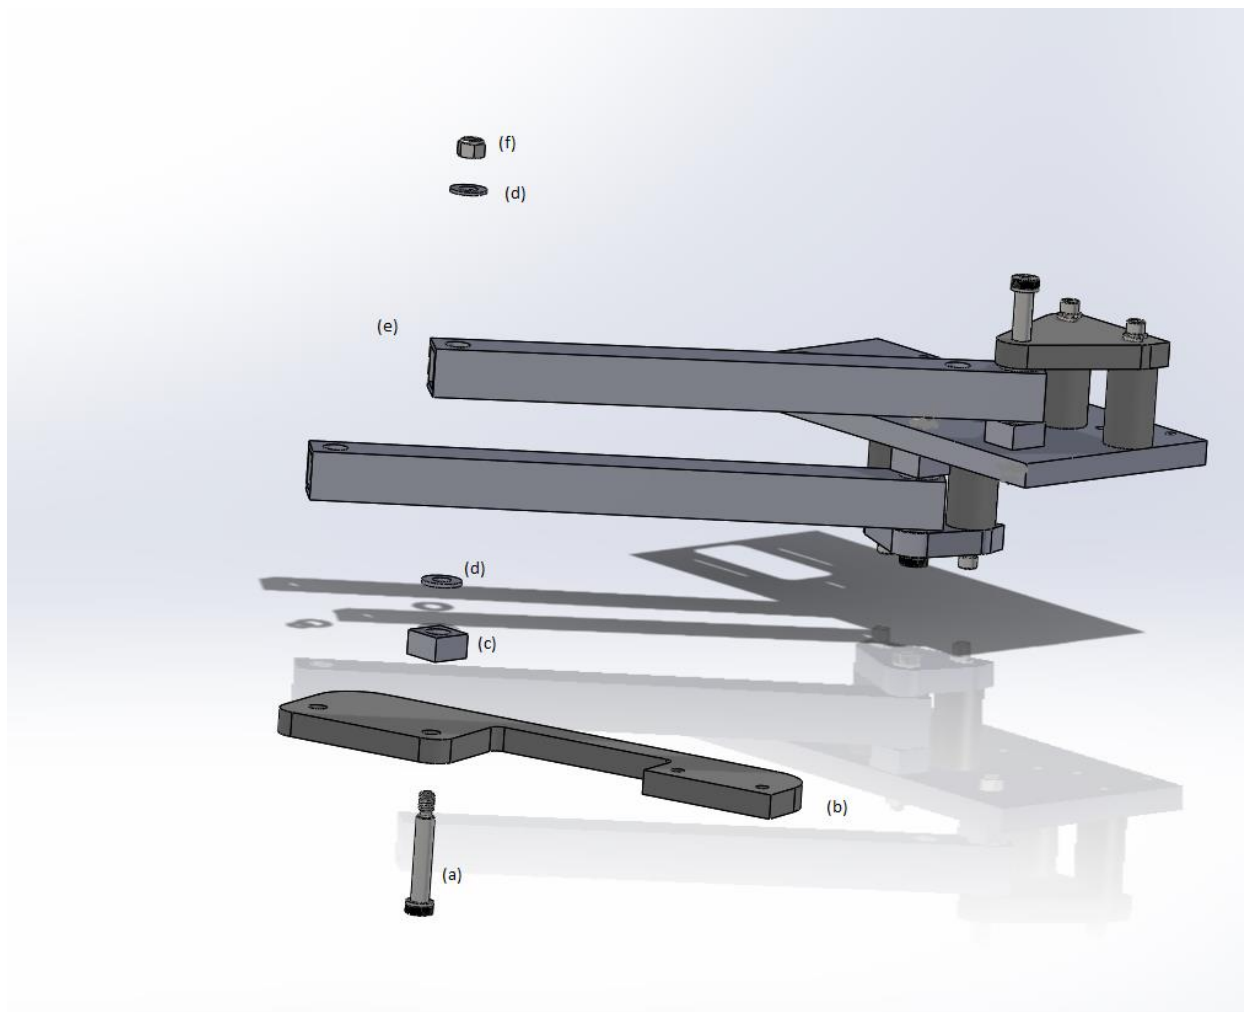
Step 6 exploded view of attaching input link to coupler
